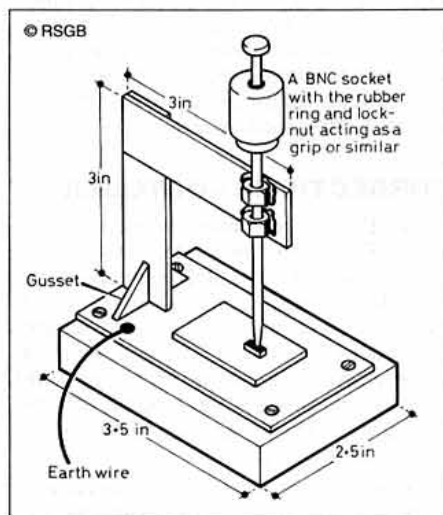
G3ZHE's home-made jig making it easy to hold the components to the PCB for soldering.
